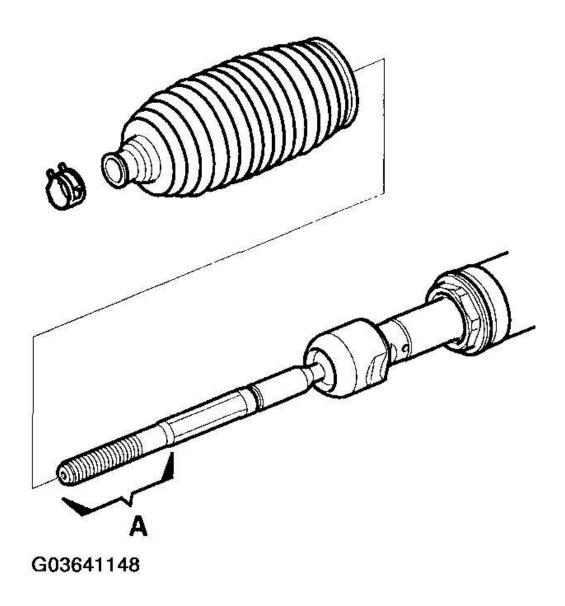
Installing Boots On Rack Ends With Tie-Rod Clips Courtesy of AMERICAN HONDA MOTOR CO., INC.
